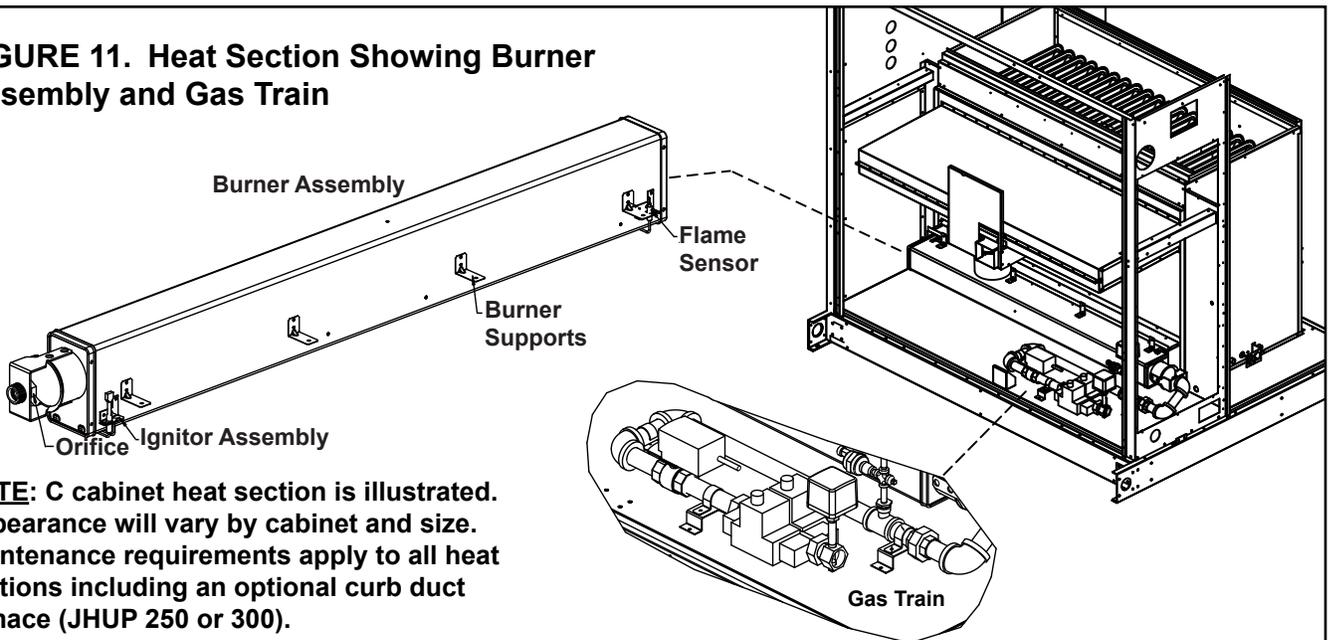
Heat Section Showing Burner Assembly and Gas Train
